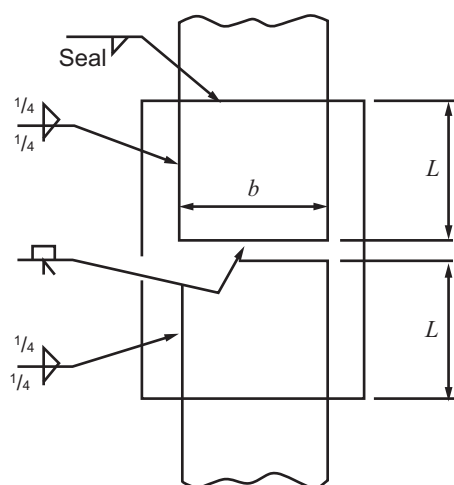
Typical Anchor Strap Welded Attachment (for Carbon Steel Tank)
